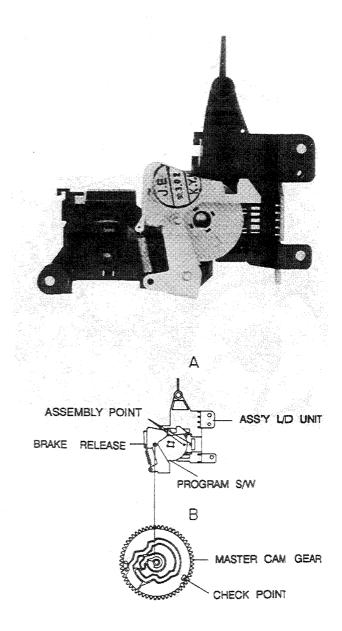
Ass'y Loading Unit Master Cam Gear Assembly
